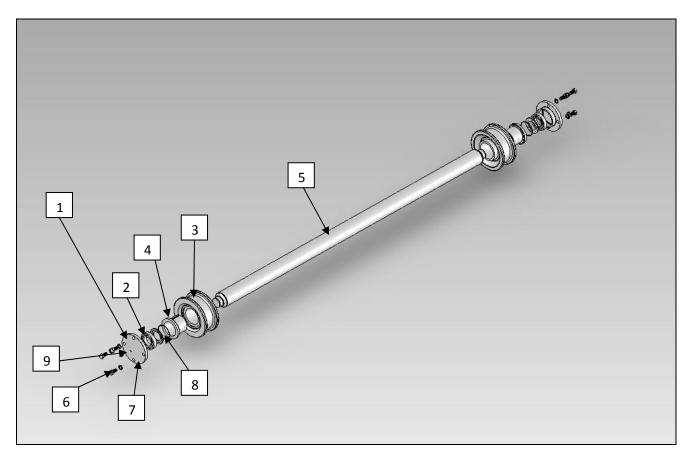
, WHEEL AND DRIVE AXLE ASSEMBLY
